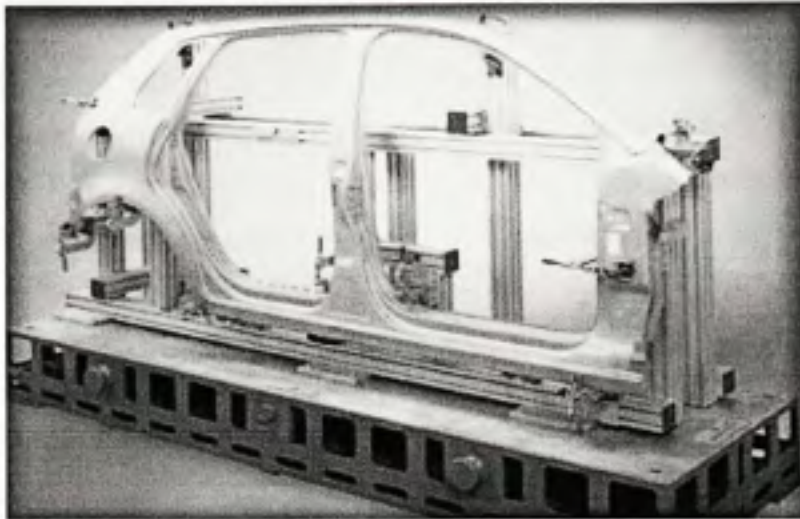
Dedicated inspection fixture for outer panel.
